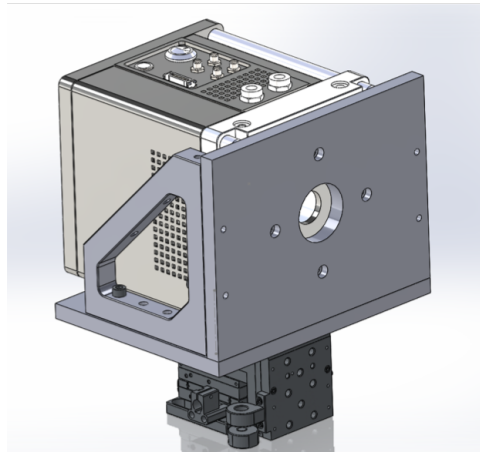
Imaging camera assembly. The Nuvu Hnu 512 is bolted to the front plate and an interface plate mounts this to an X, Y, Z translation stage
